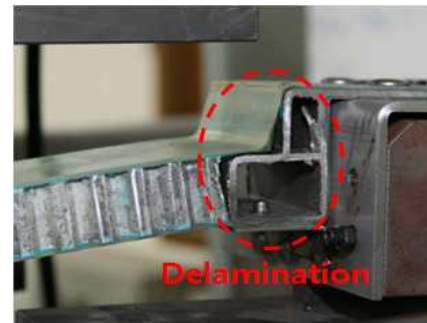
Photograph of the fracture mode of hybrid joint part specimen under the cyclic bending loads ①
